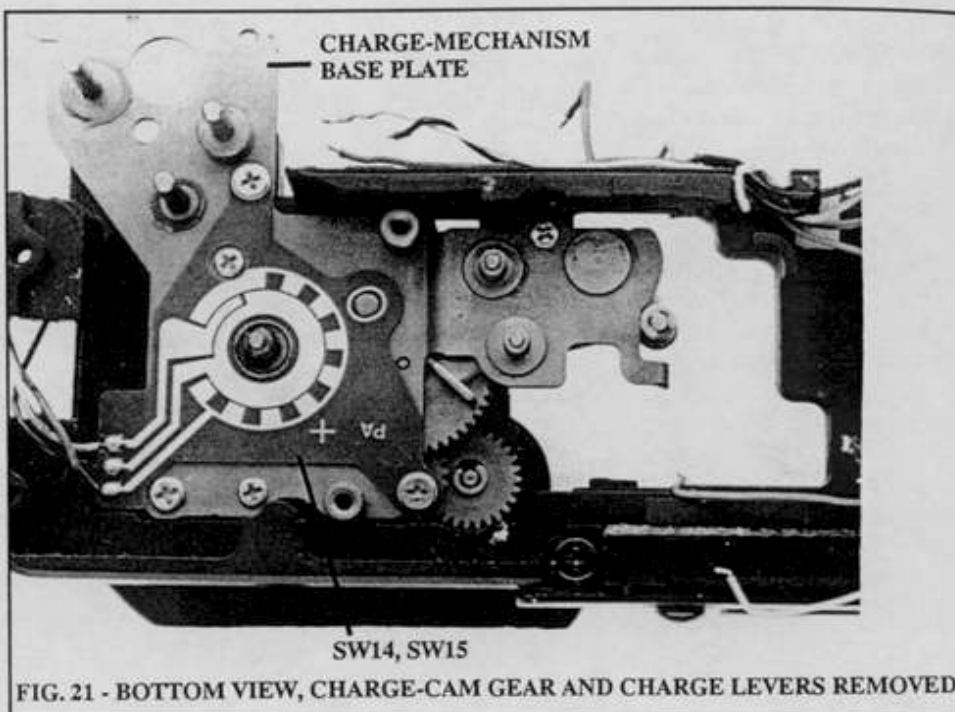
BOTTOM VIEW, CHARGE-CAM GEAR AND CHARGE LEVERS REMOVED
